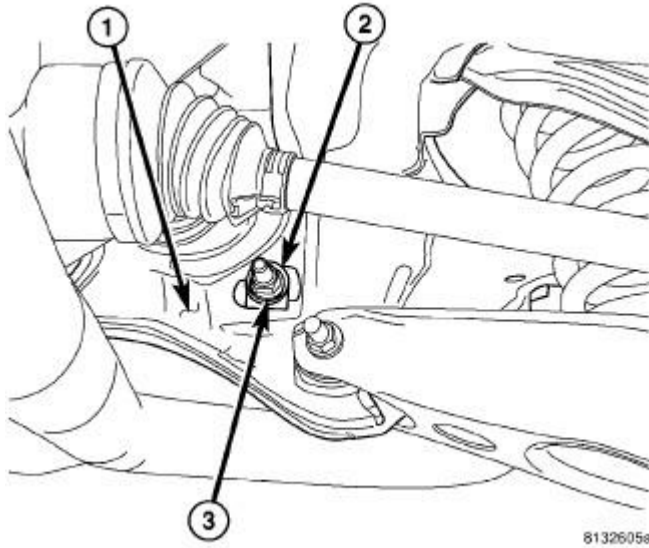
REAR TOE ADJUSTMENT BOLT NUT
